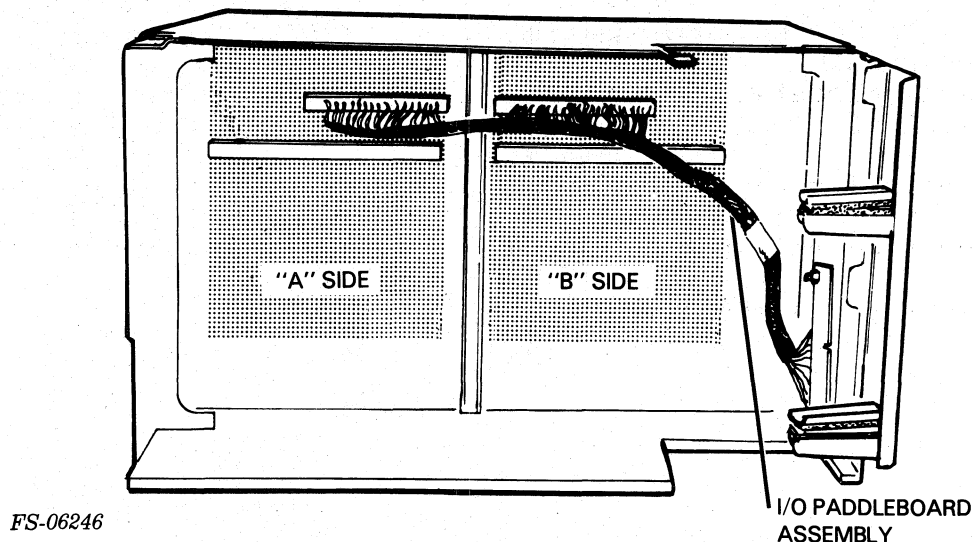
Edge Connectors in Side Mounted Paddleboard
